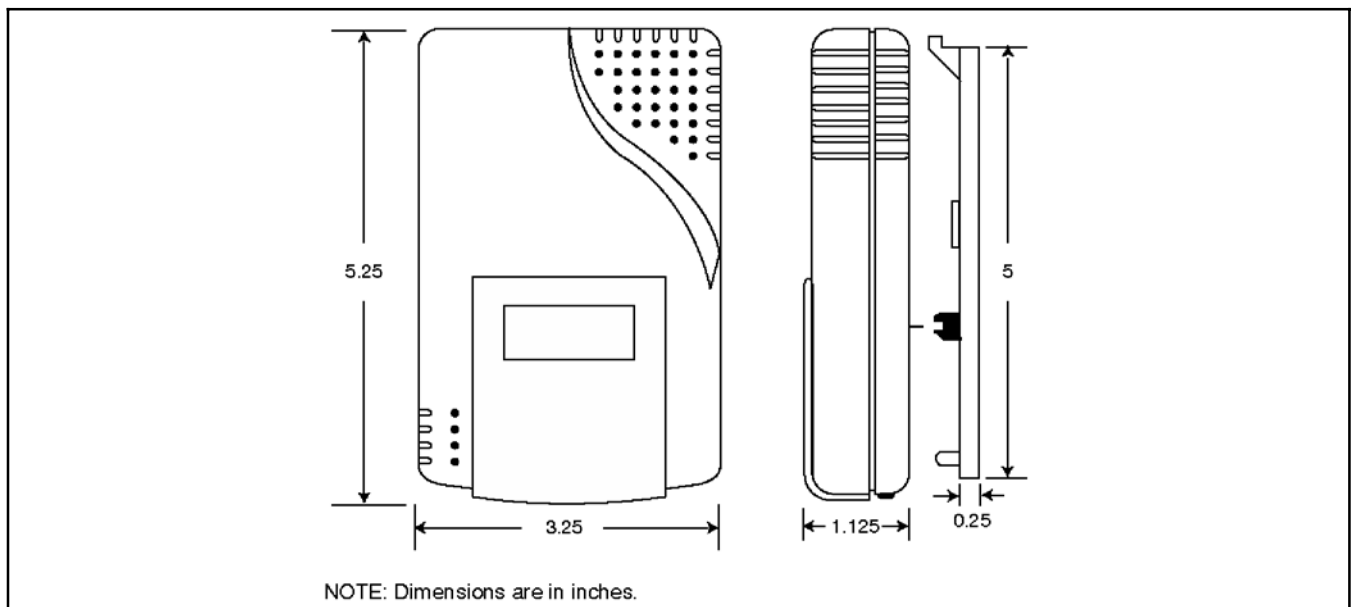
Fig. 1 - CO₂ Sensor Dimensions
